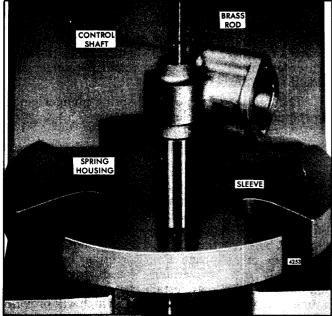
Removing Shaft and Bearing from Spring Housing
